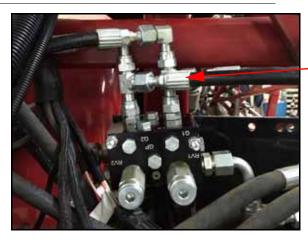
Rod-End Right Cylinder Hose Installed on UltraGlide XT Valve
